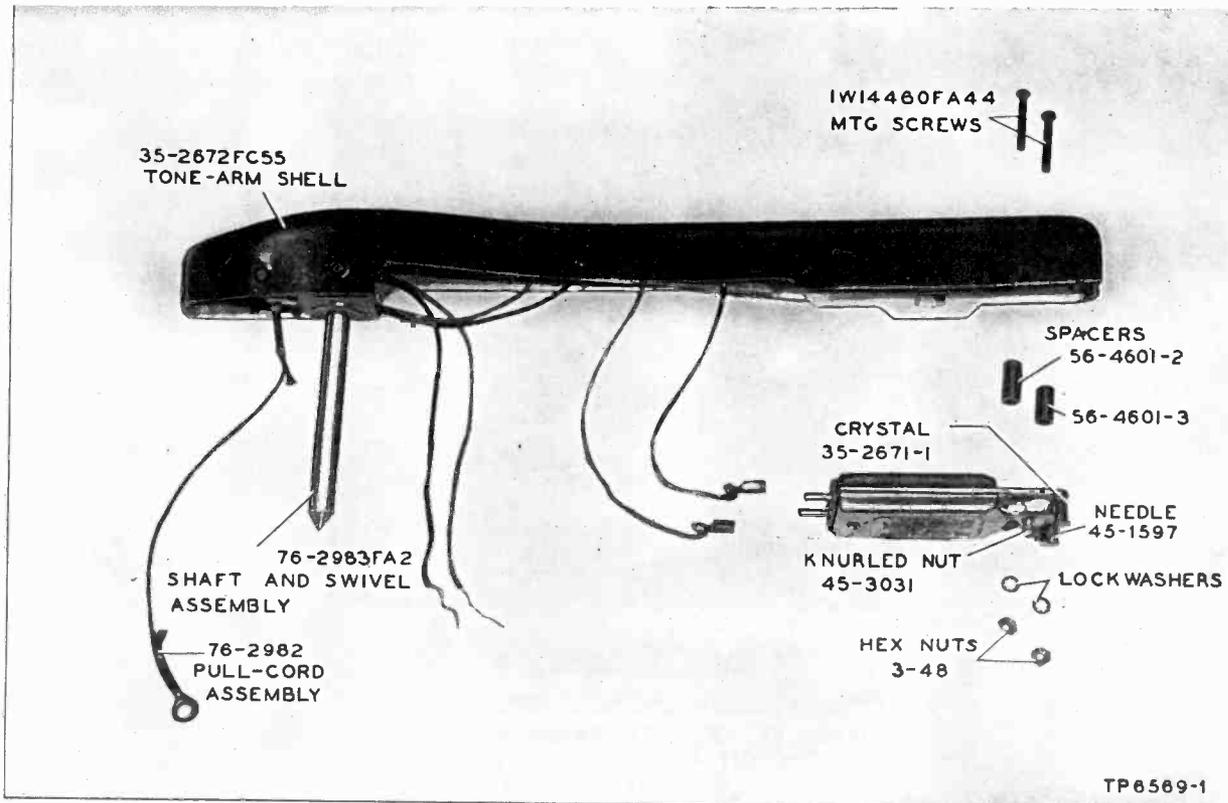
Record-Changer Tone-Arm Assembly, Part No. 35-2663-2
